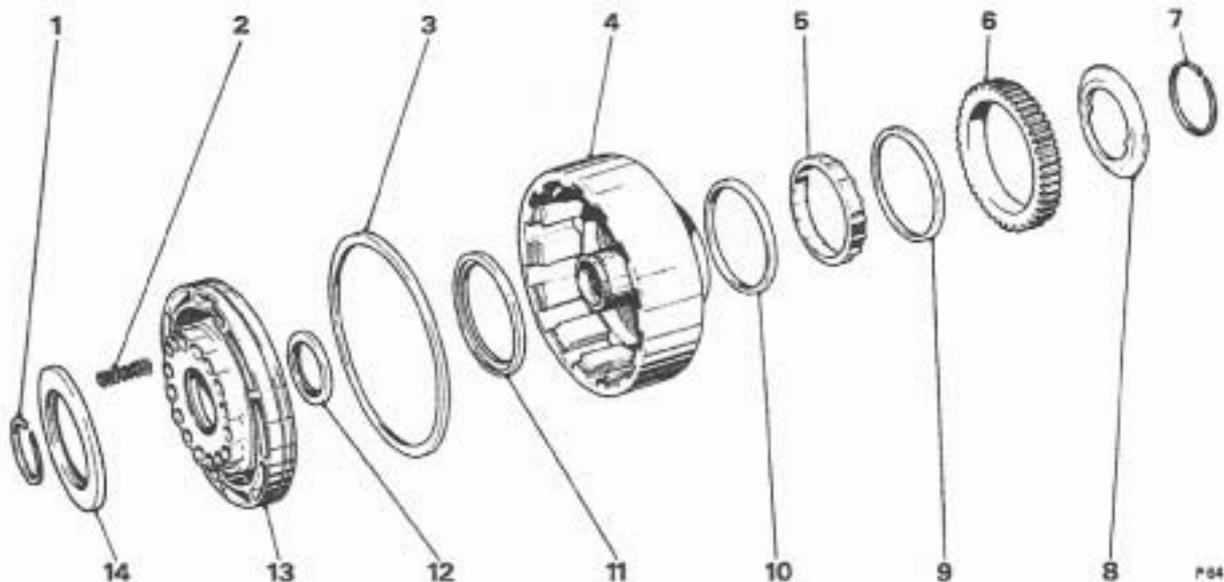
DIRECT CLUTCH AND INTERMEDIATE SPRAG ASSEMBLY
